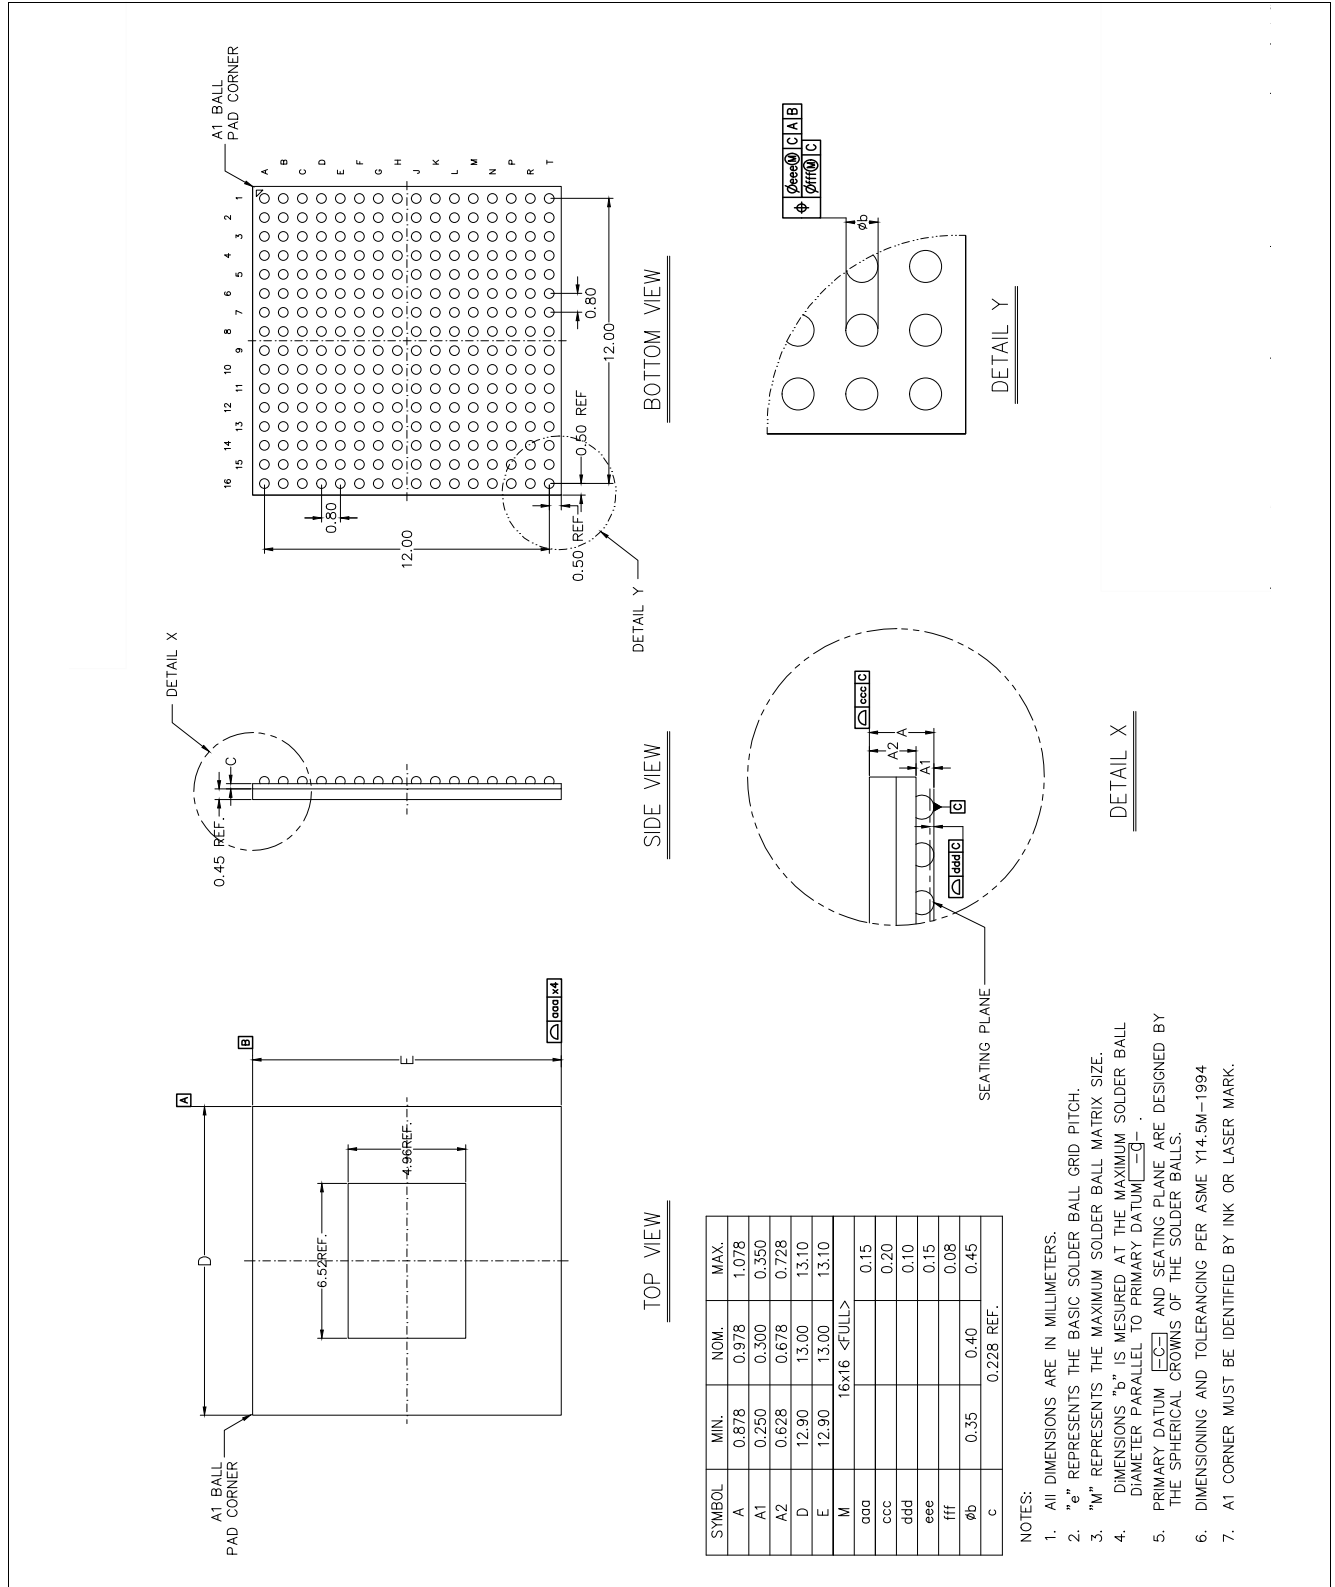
PG-FCLBGA-256 13 mm x 13 mm Package Outline
